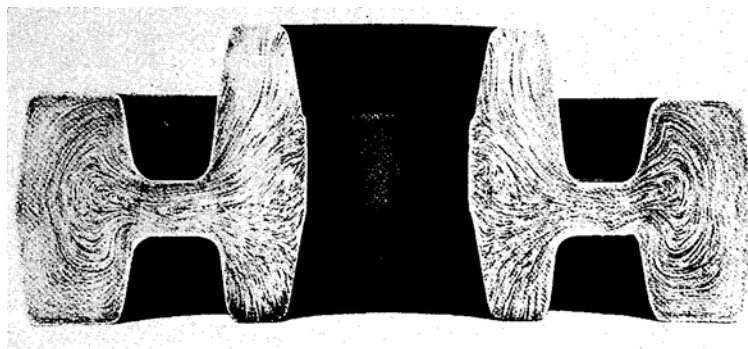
An example of grain flow lines in a forged gear blank, visible after sectioning.
